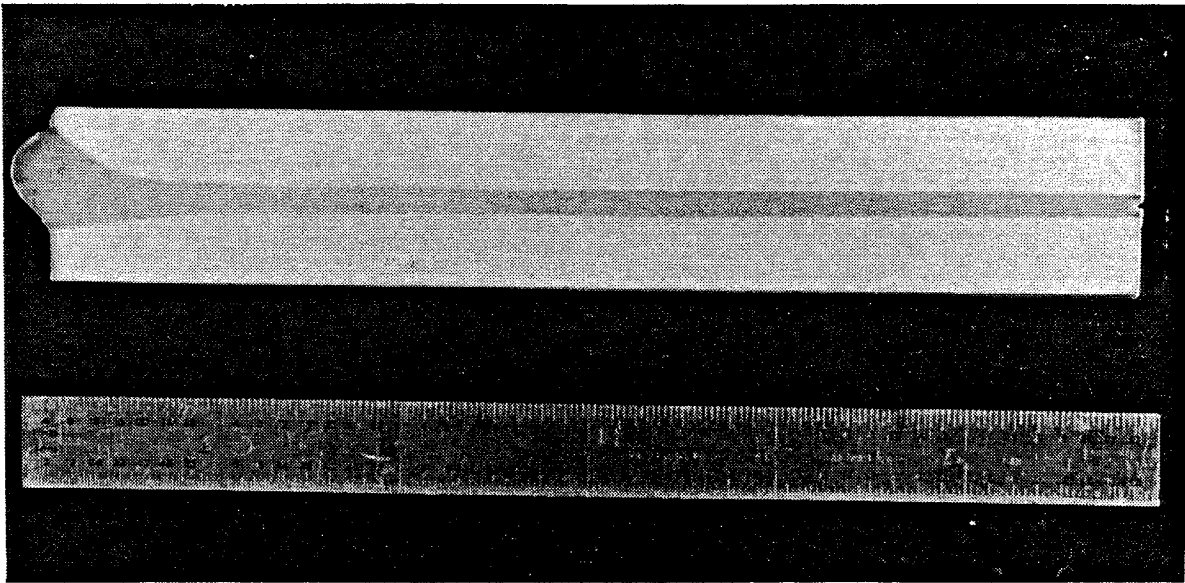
Electron Beam Weld in 6.0 inch Aluminum
